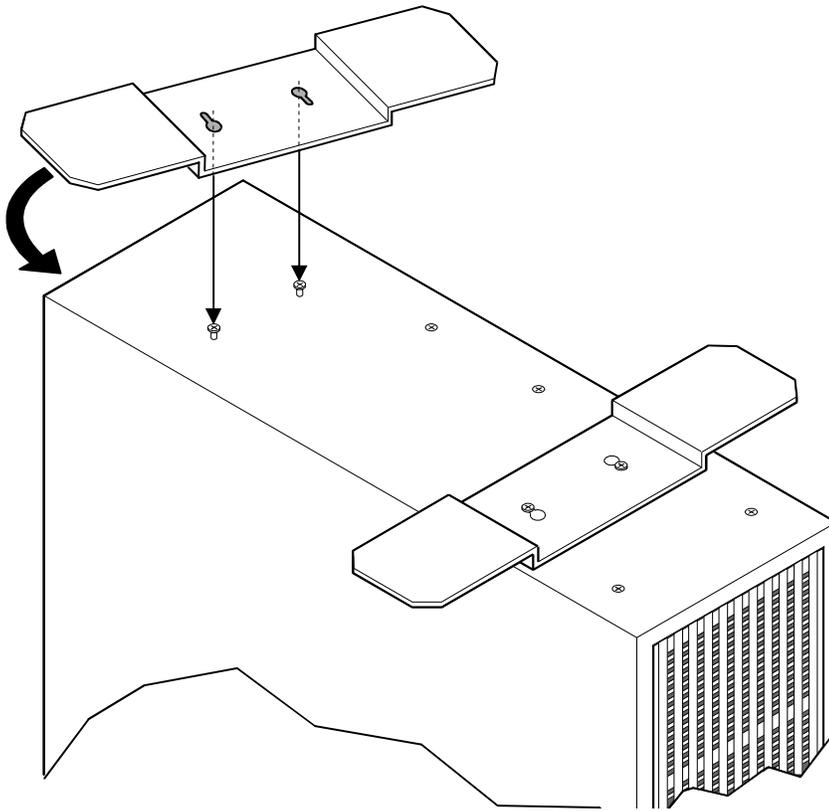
Attaching the MAP/40P Stabilizing Feet
